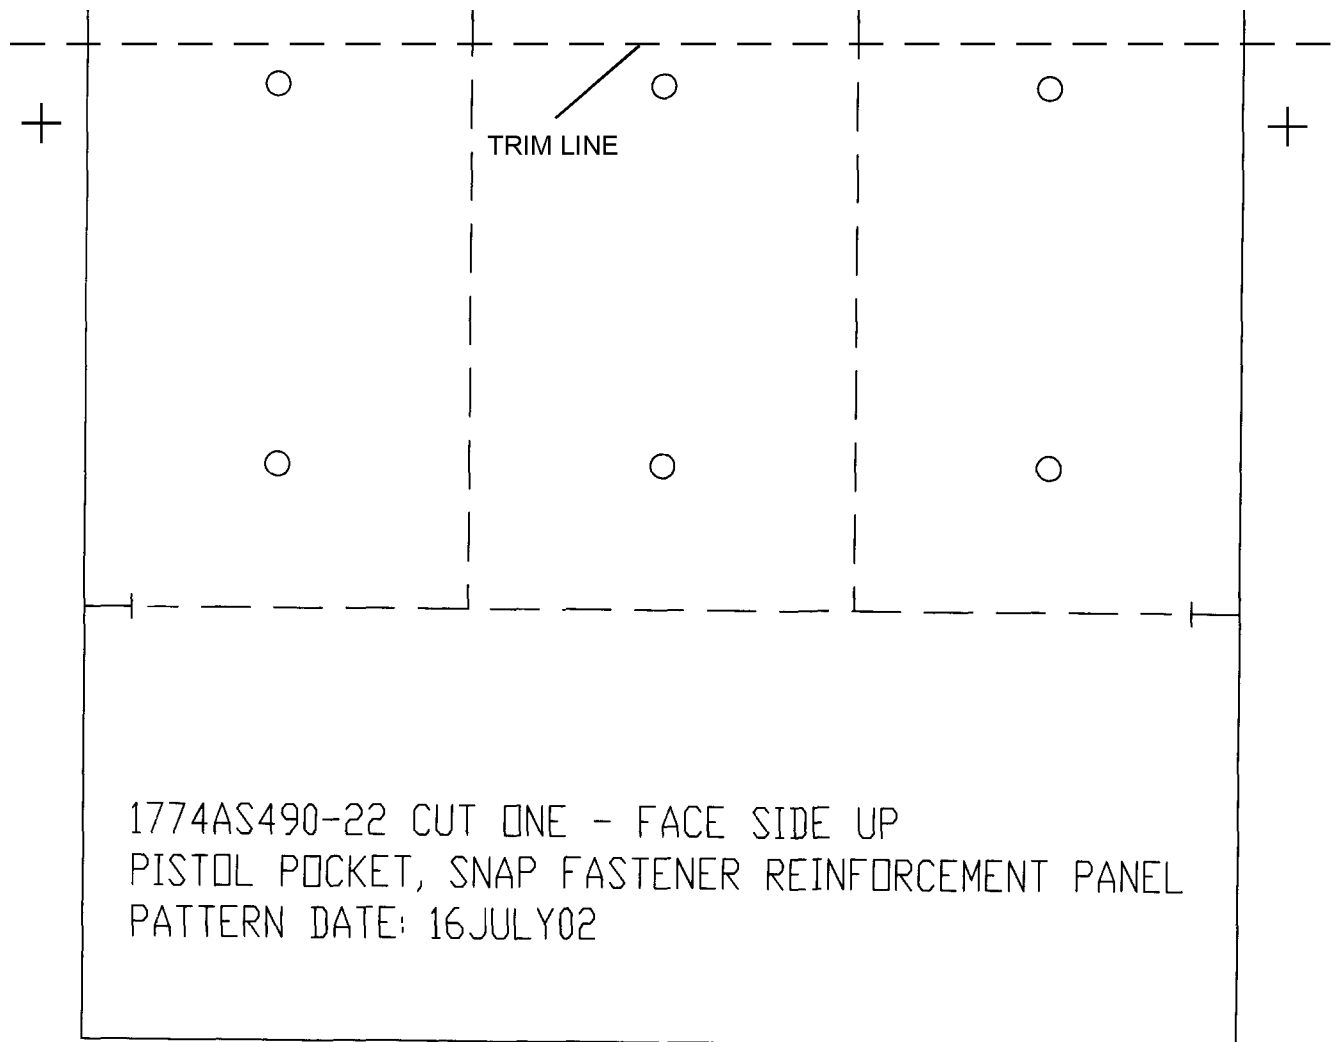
C. Pistol Pocket Snap Fastener Reinforcement Panel Pattern (Sheet 2 of 2)
